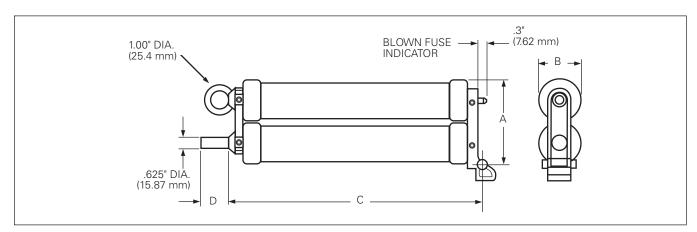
X-Limiter full-range current-limiting unitized fuse details and dimensions. (See table 2 for dimensions)
